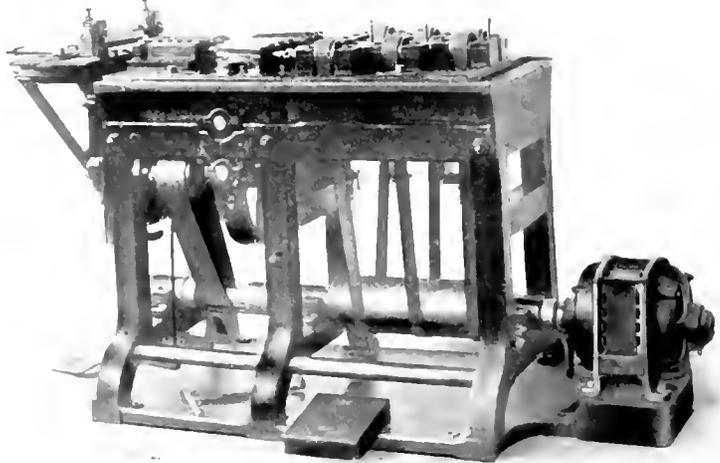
5 H.P. Induction Motor Direct Connected to Driving Shaft of 6-Spindle Automatic Dowel Boring Machine
